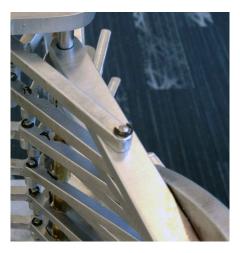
The retaining ring placed on the dowel pins keep the wing supports from falling.
